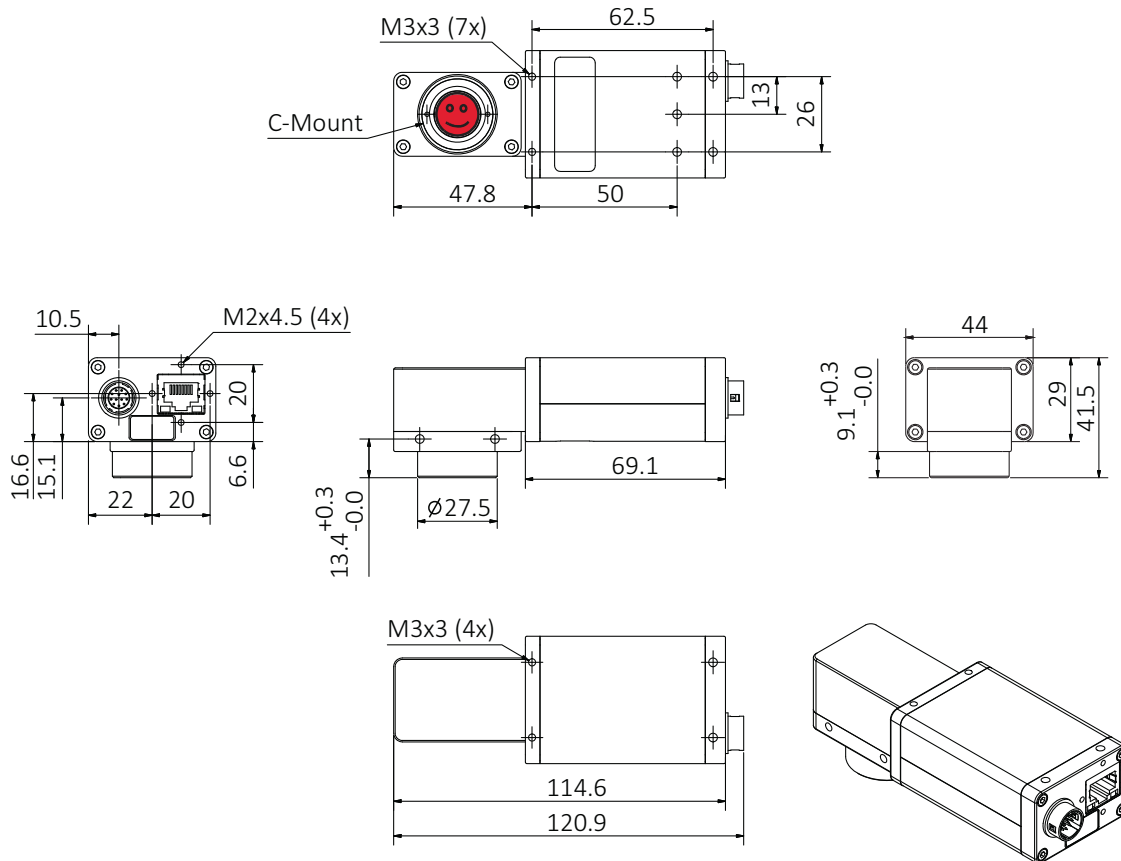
Manta W270 S90 housing dimensions (including connectors)
